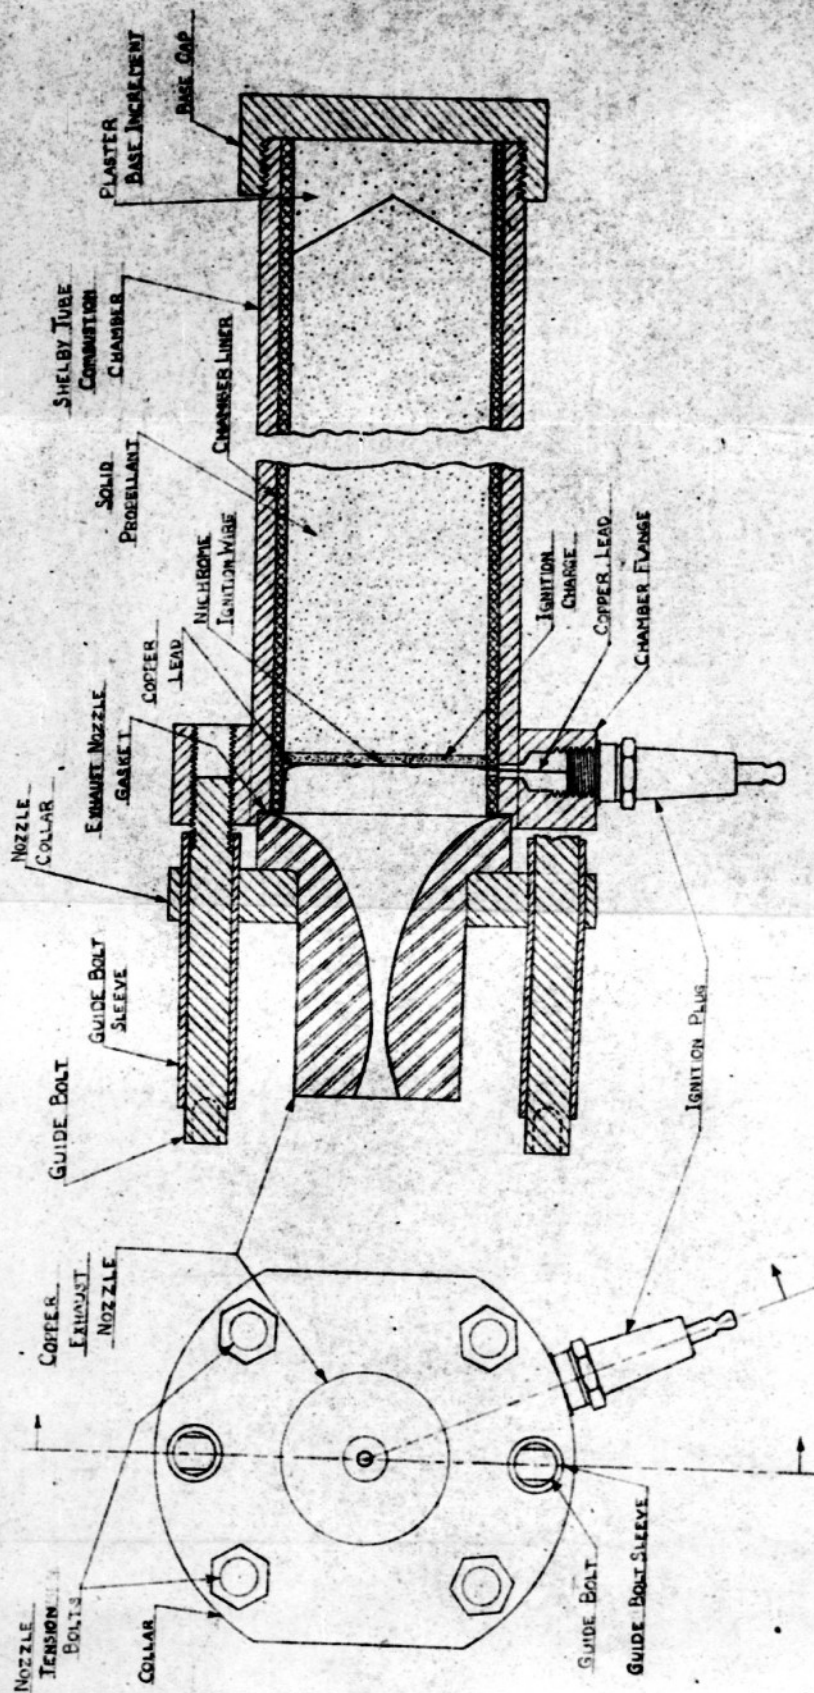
View of component parts of the Ercoupe jet unit.
